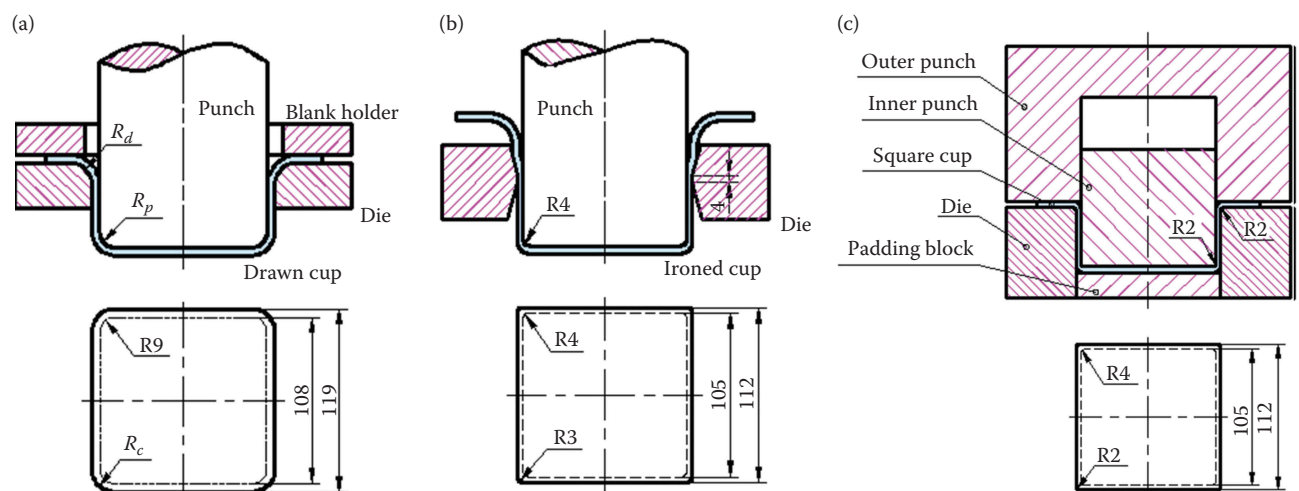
Schematic diagram of the three steps of the stamping-forging processing of square cup of (a) deep drawing, (b) ironing, and (c) upsetting
